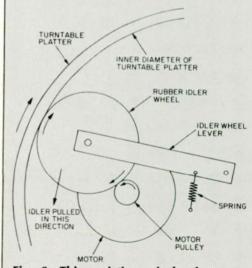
This variation of the lever system jams the idler wheel between the motor pulley and the platter rim.
